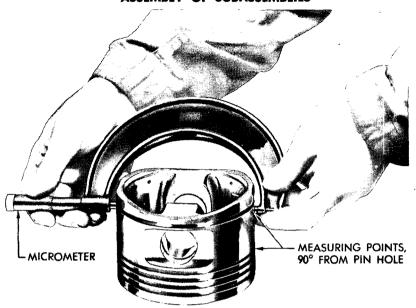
Measuring Piston Diameter Using Caliper 41-C-307
